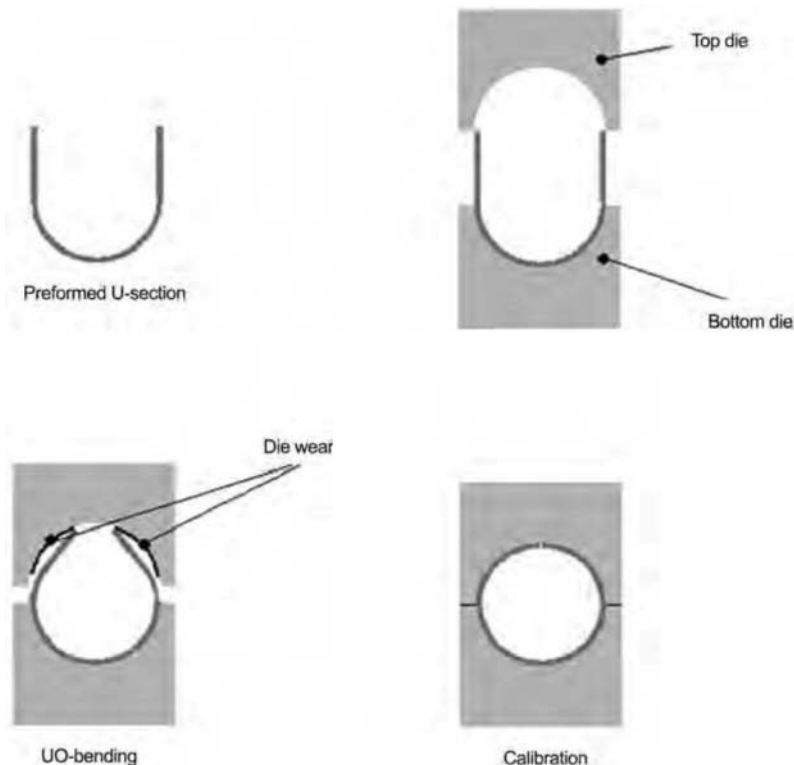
Two-step forming process to produce bearing sleeves with the U-O bending technique. Source: Ref 11.18
